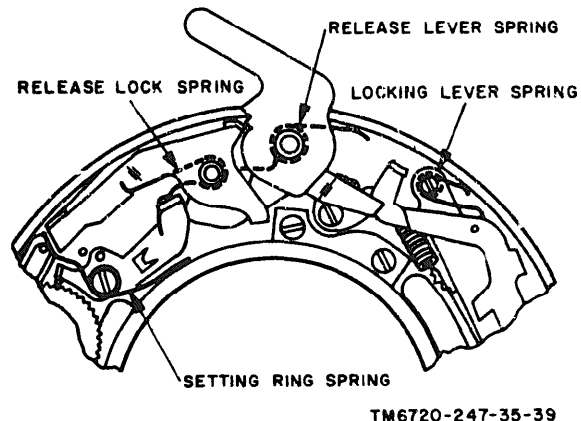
Shutter No. 0, spring positions (3 of 4).
